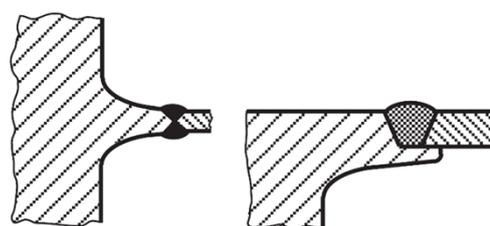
Welding flanges on steel castings or forgings
